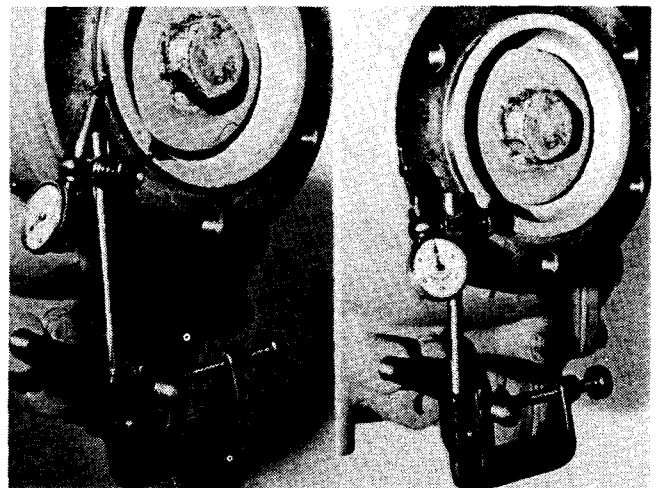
, (N114156). Checking crankshaft flange eccentricity and wobble
